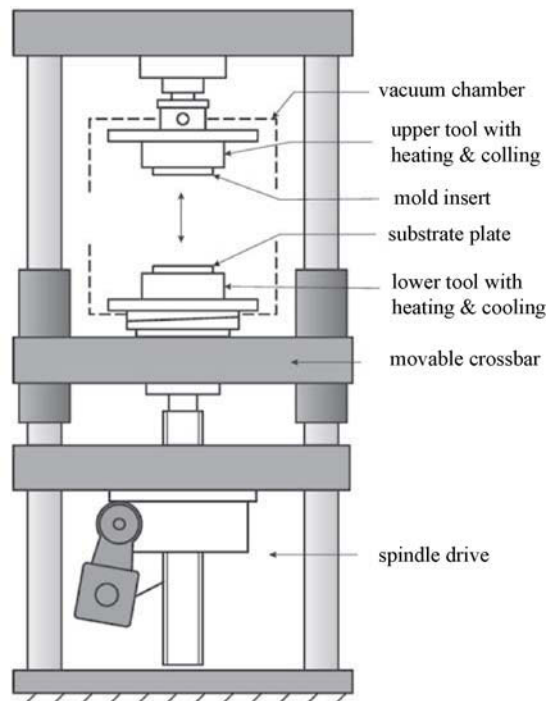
Schematic view of the components of a hot embossing machine.
